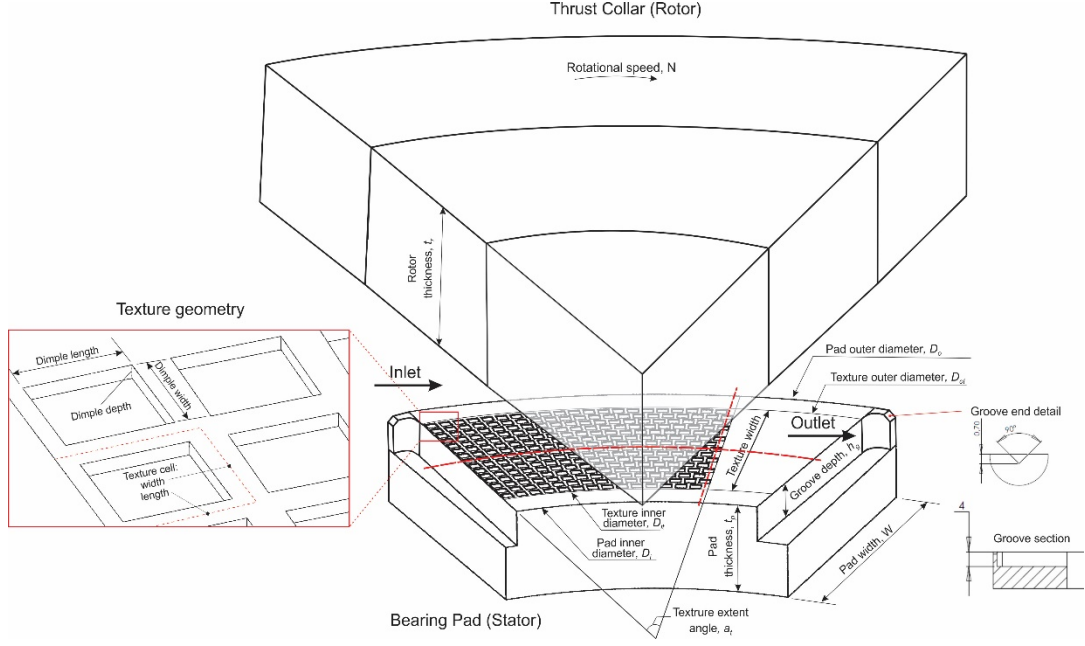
Sketch of the bearing of the present study and top view of the bearing pad
